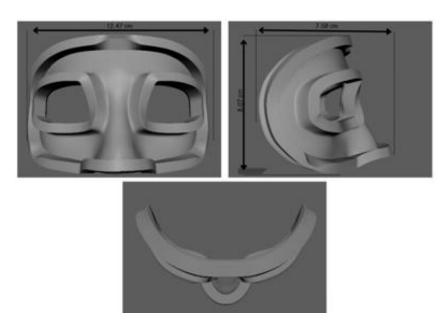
Final CAD model of the Face Mask mold- VERSION A.
